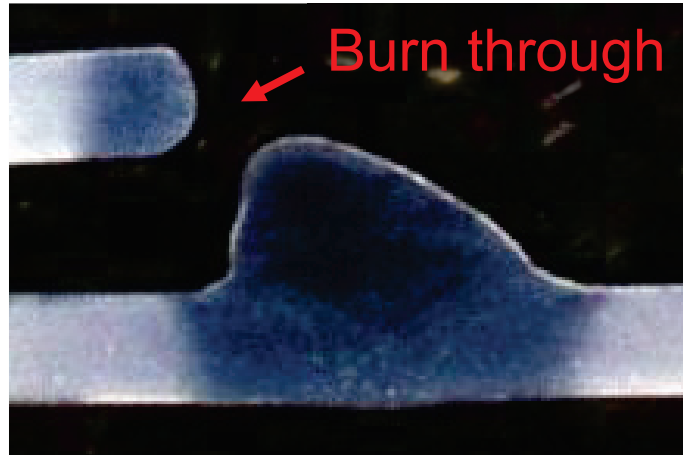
Burn through on lap fillet joint using galvanized steel sheets.
